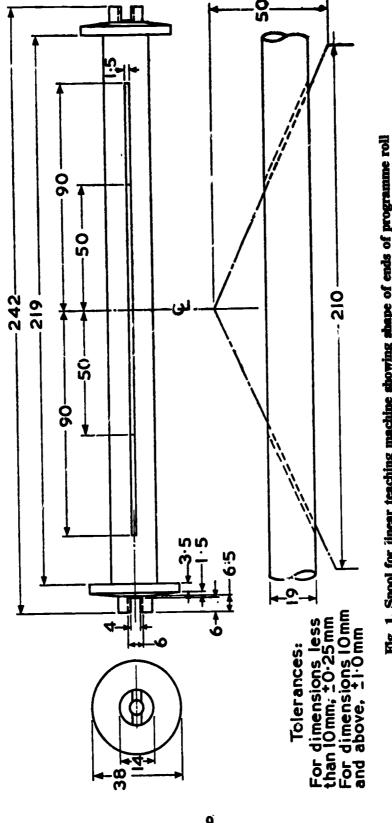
Spool for linear teaching machine showing shape of ends of programme roll All dimensions in millimetres.
